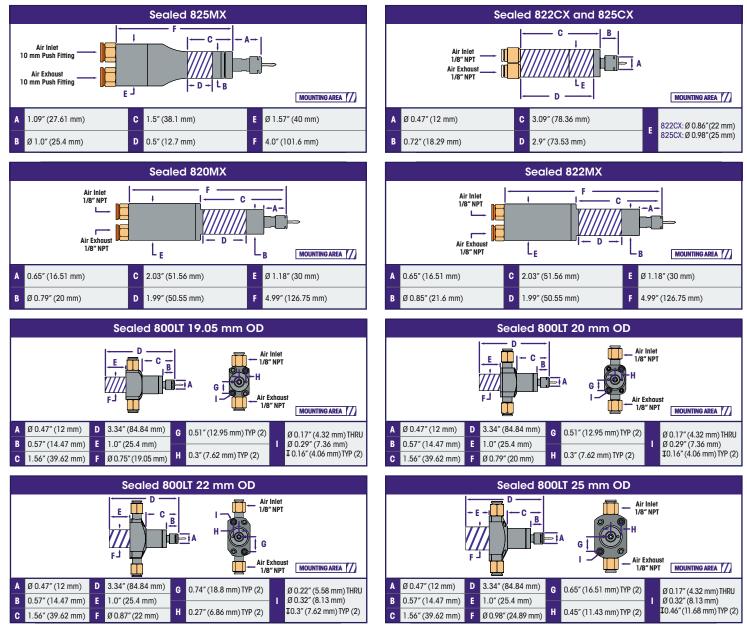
Tables that show the proper mounting area and dimensions for mounting Air Turbine Live Tools®
